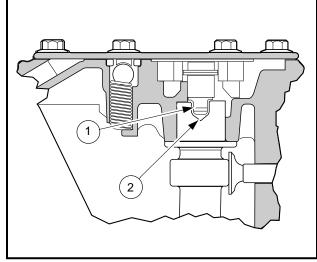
Align Timing Marks between Camshaft and Crankshaft
